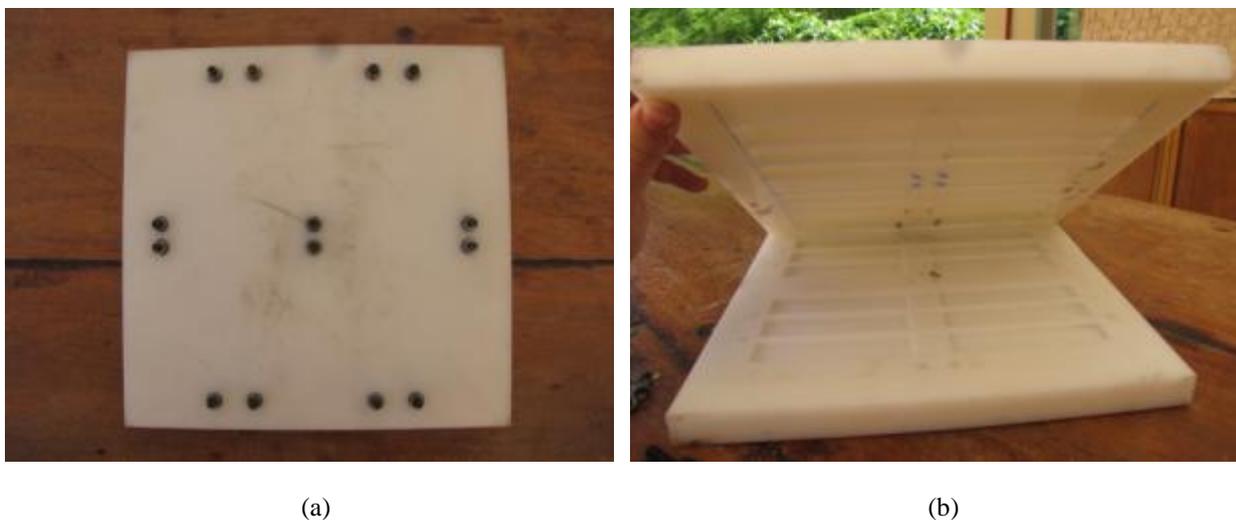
Polyethylene guiding mold. (a) Top view; (b) open mold.
